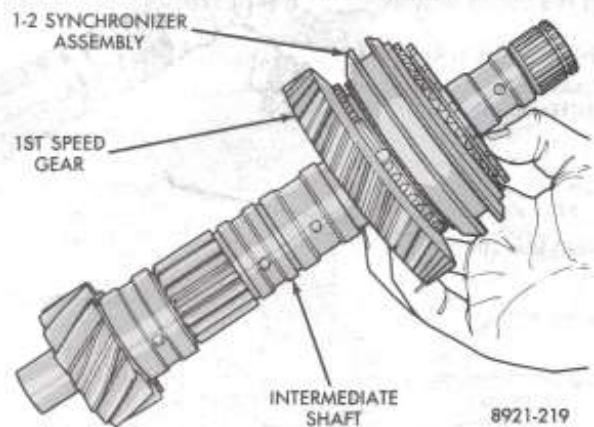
1st Speed Gear and 1-2 Synchronizer Assembly
